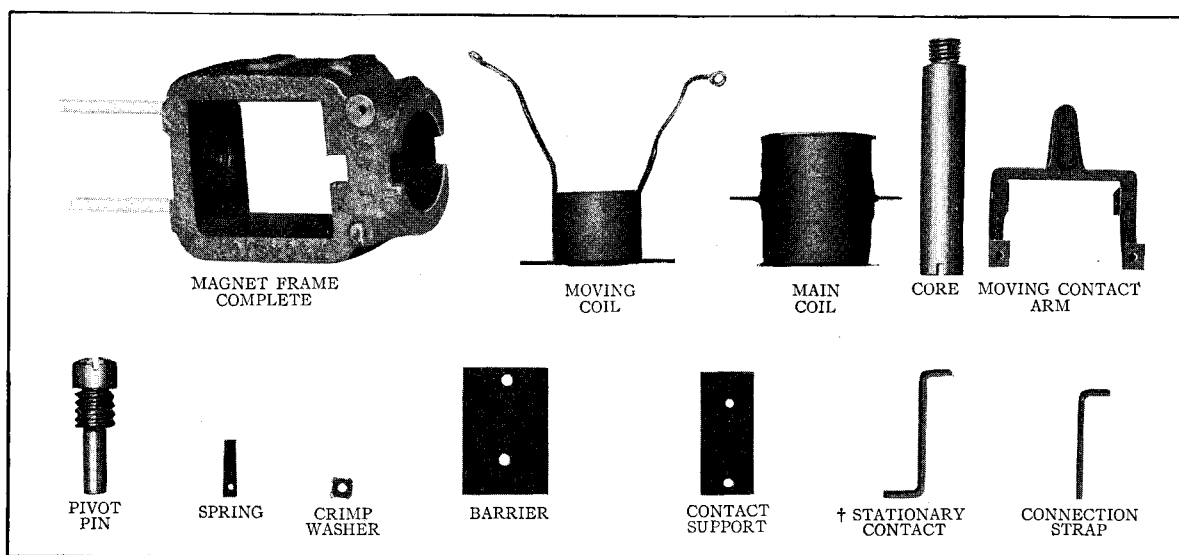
RENEWAL PARTS FOR TYPE PR PLUGGING RELAY
